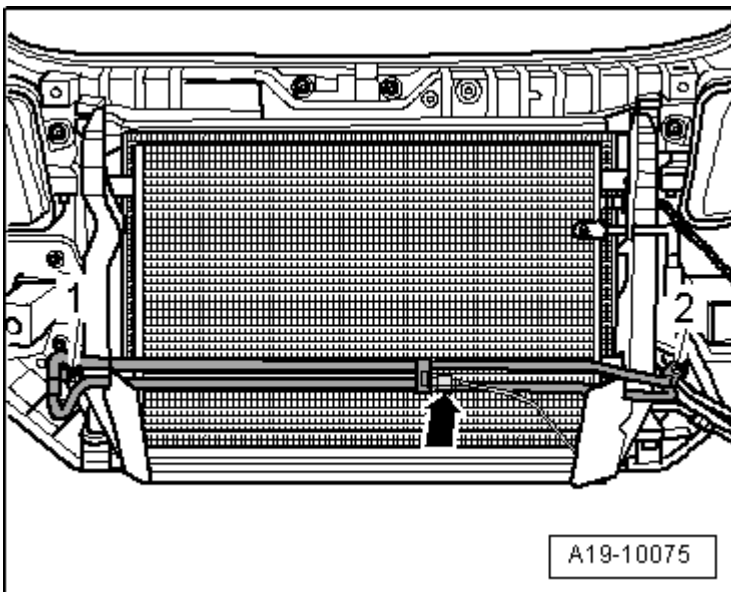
Unclipping Outside Air Temperature Sensor G17 From Bracket & Removing Power Steering Cooling Coil Bolts
